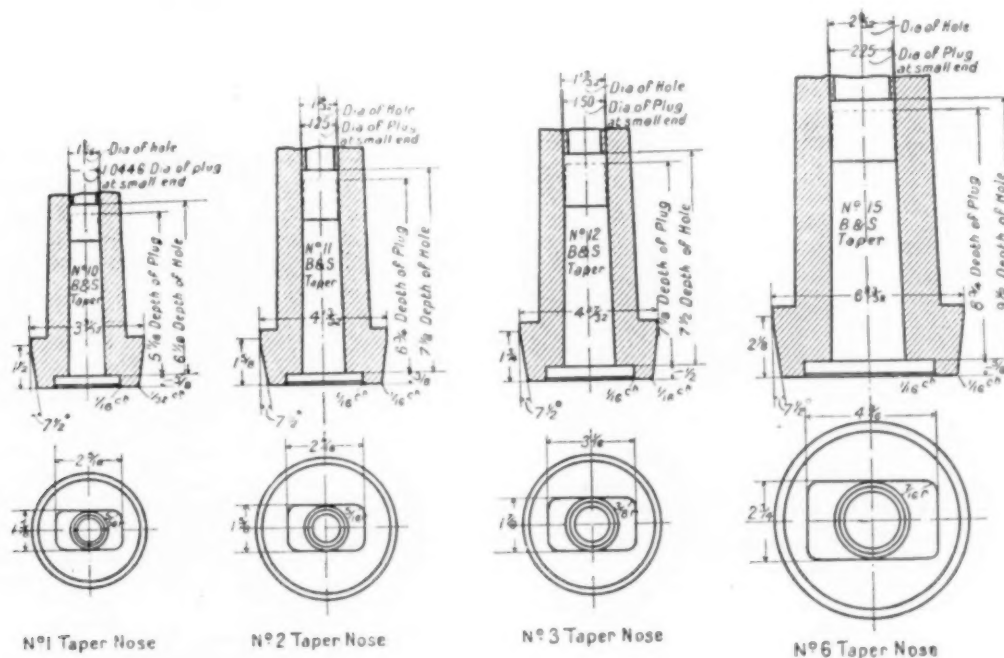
SUGGESTED STANDARD NOSES FOR MILLING-MACHINE SPINDLES
